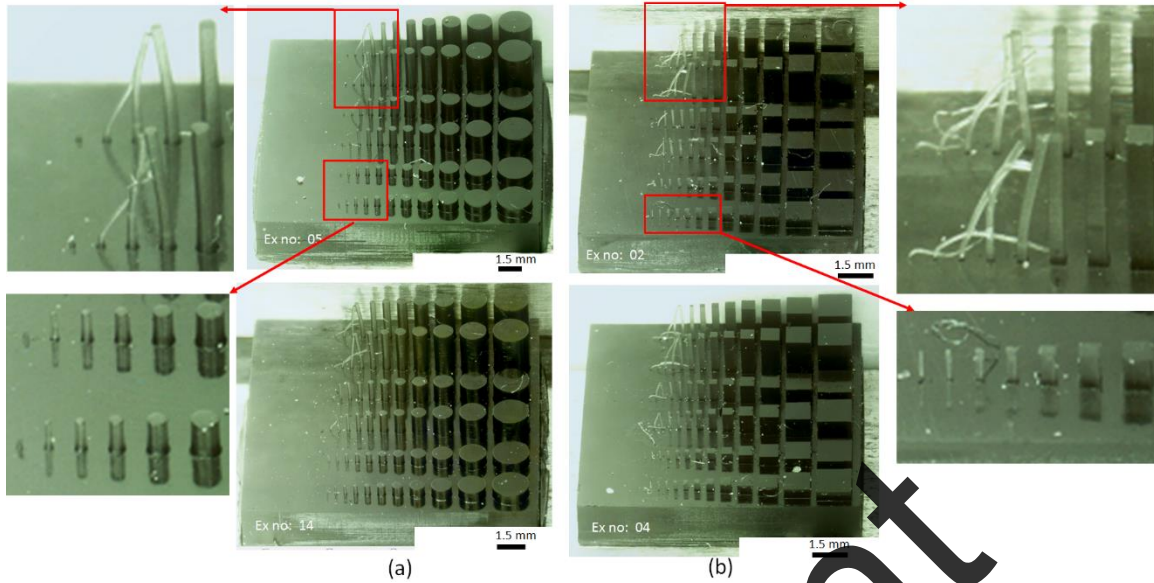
the printed samples (a) cylindrical (b) cube.
